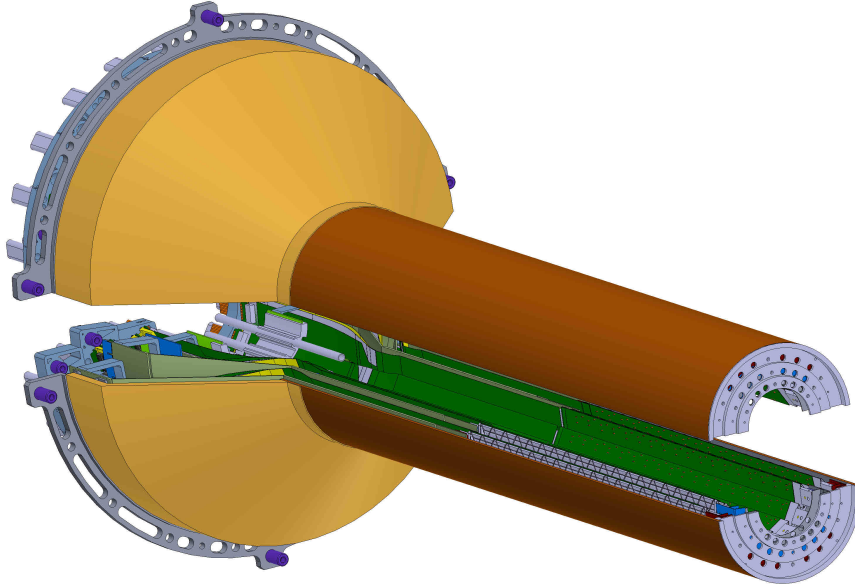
MVTX Stave and Half-Layer: each half-layer is composed of a set of staves fixed to wheel-shaped support structures. The layout shown here is from the ALICE ITS IB design. For MVTX, the barrel part of the left-hand side End-Wheel will be extended by about 230mm.
